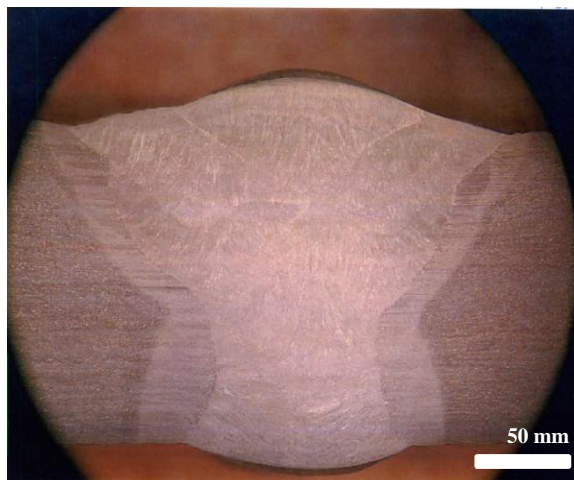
Macroscopic examination of S355J2+N welded steel specimen
